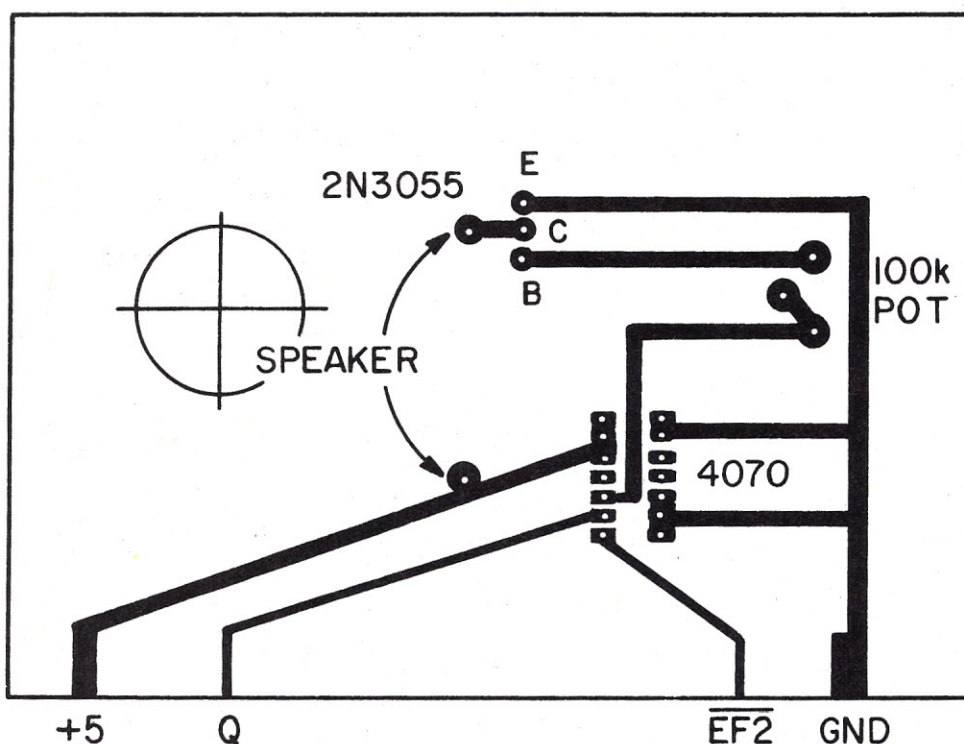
Printed circuit pattern for the reverse side of the board. A hole is drilled where indicated for mounting the speaker.
